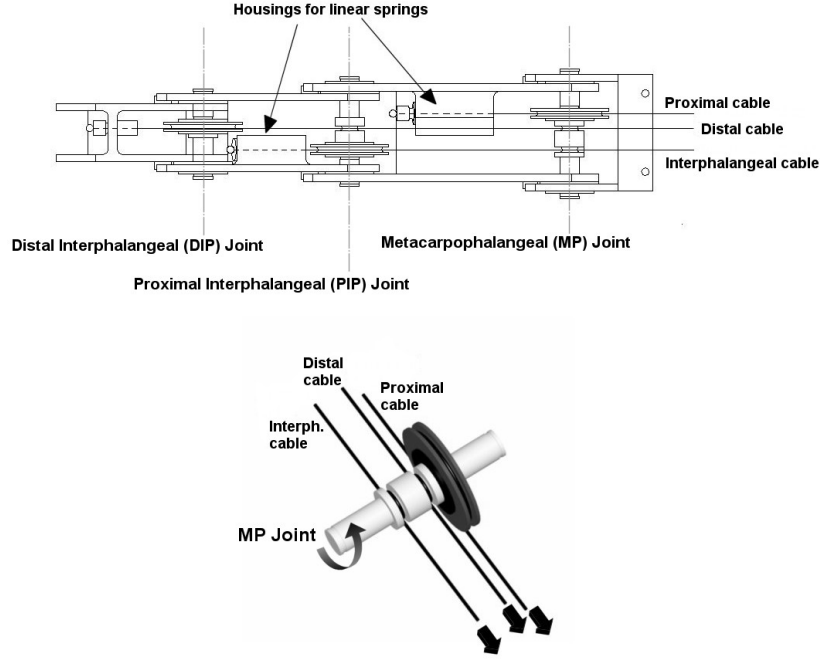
Top view of the finger prototype showing cable transmission with springs (upper) and detail drawing of the Metacarpophalangeal (MP) joint (lower).
